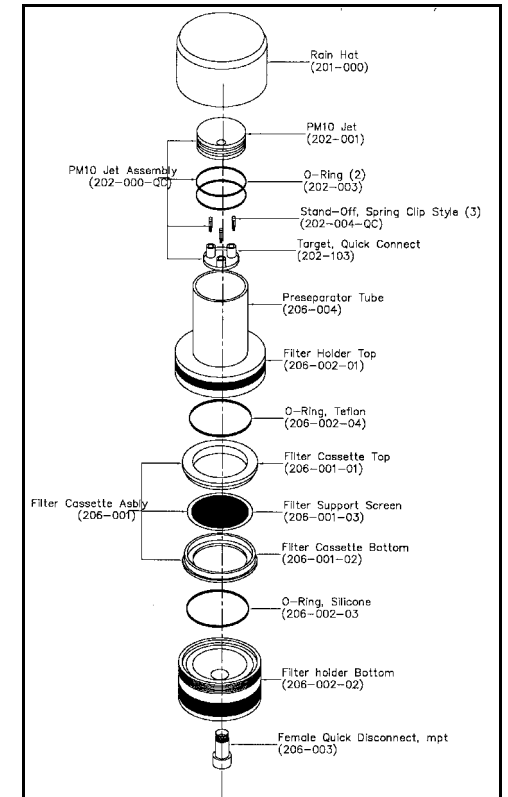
PM₁₀ Preseparator and Filter Holder Assembly
